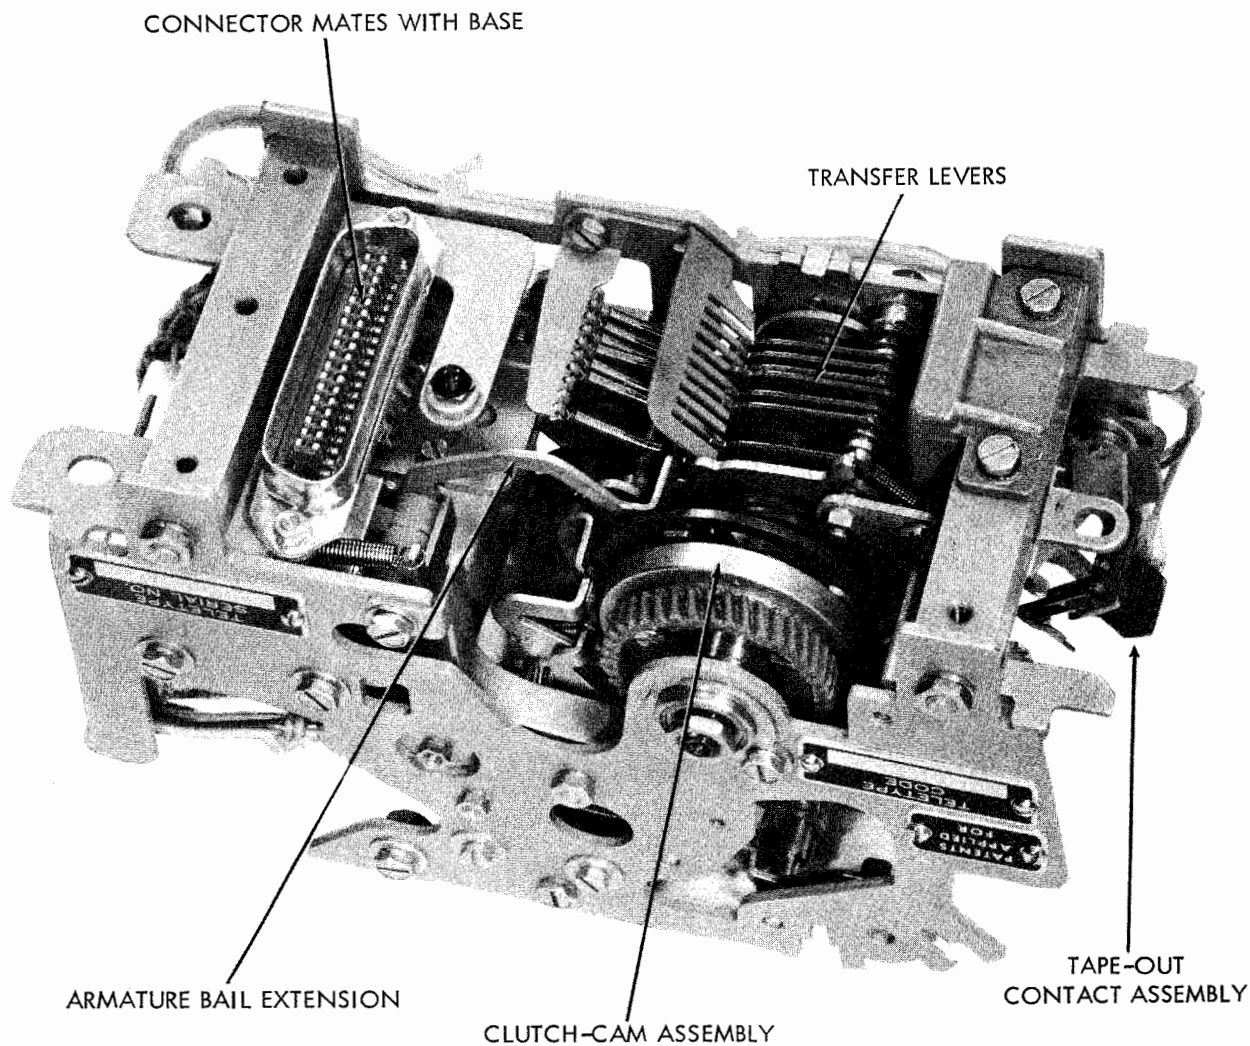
A. TRANSMITTER DISTRIBUTOR TT-311/UG (BOTTOM VIEW)
